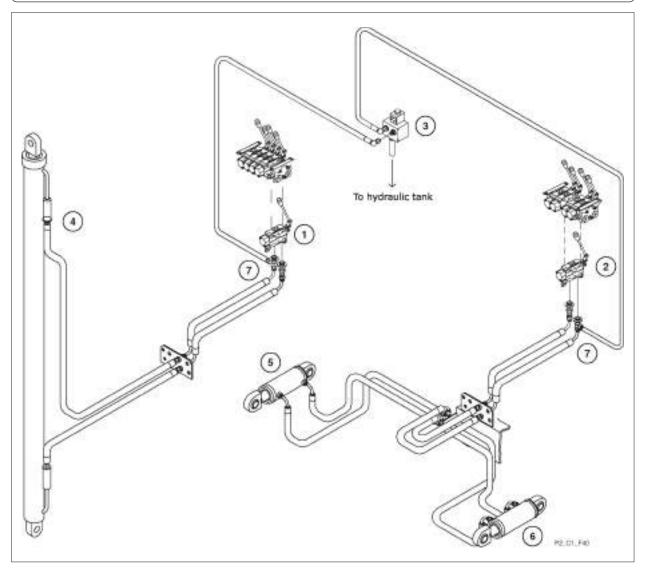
A. M8 / M50 LOWER AND GO HYDRAULIC SYSTEM COMPONENT LAYOUT
